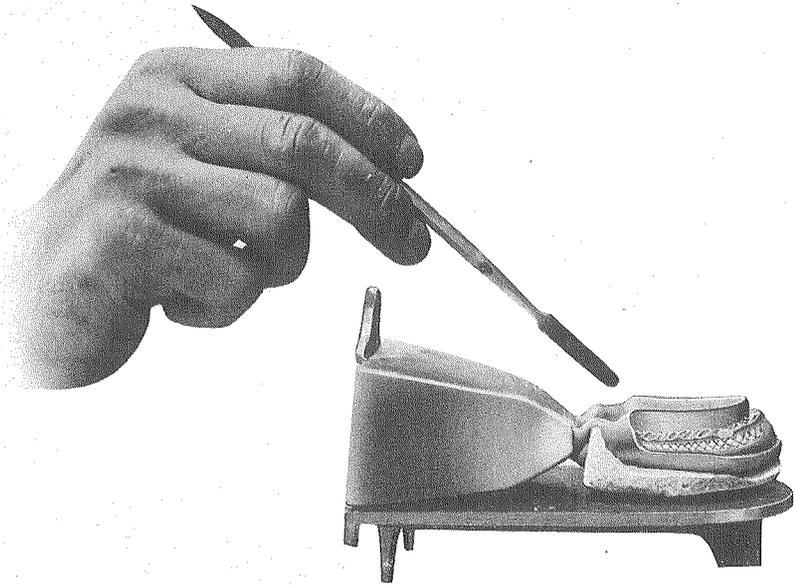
Attaching Wax Model to Crucible Former on Iron Adjustment Base
